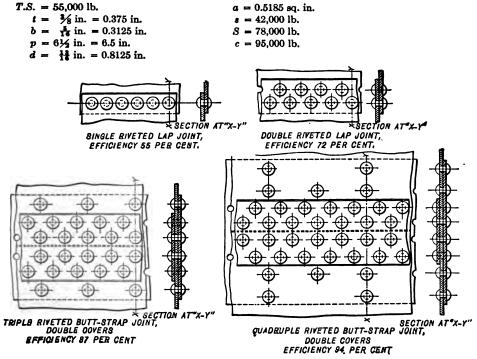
Typical Longitudinal Riveted Boiler Joints.
